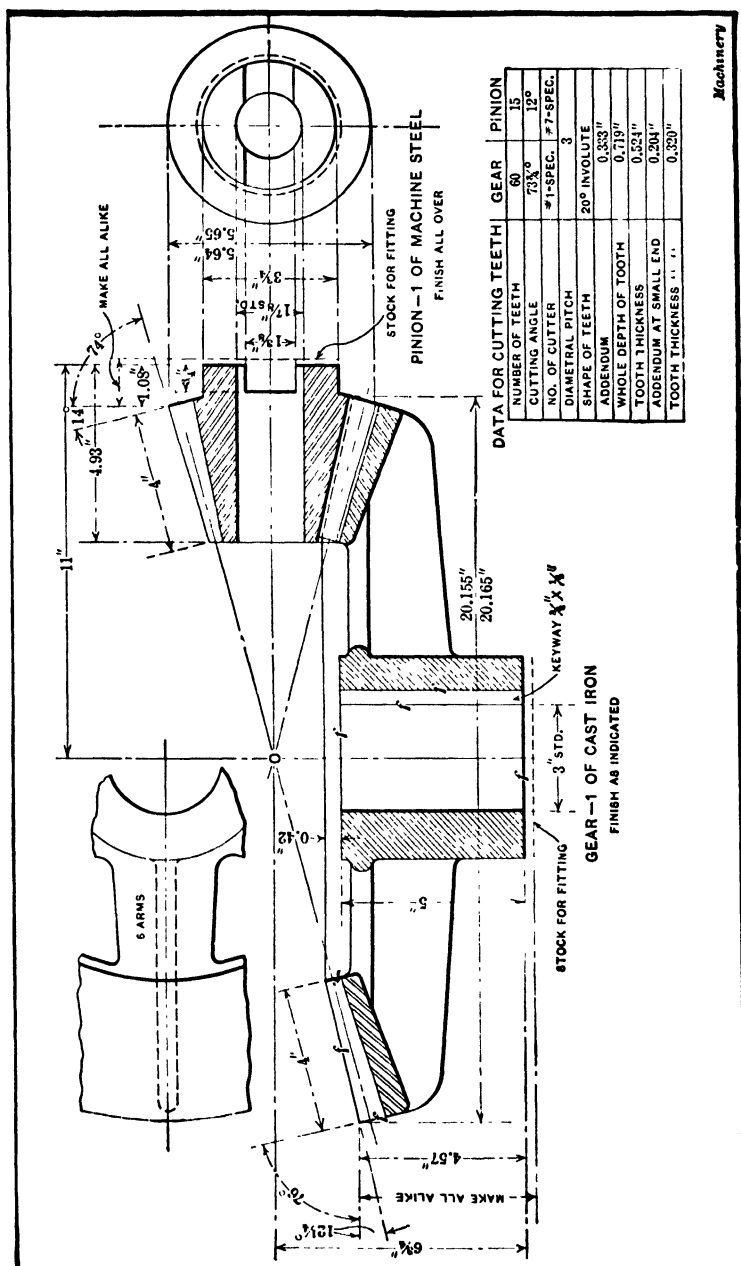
Working Drawing of Bevel Gears which are to be cut with Formed Milling Cutter
